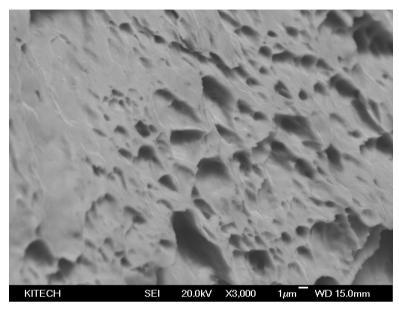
SEM image of fractured surface of spot welded joints after shear
